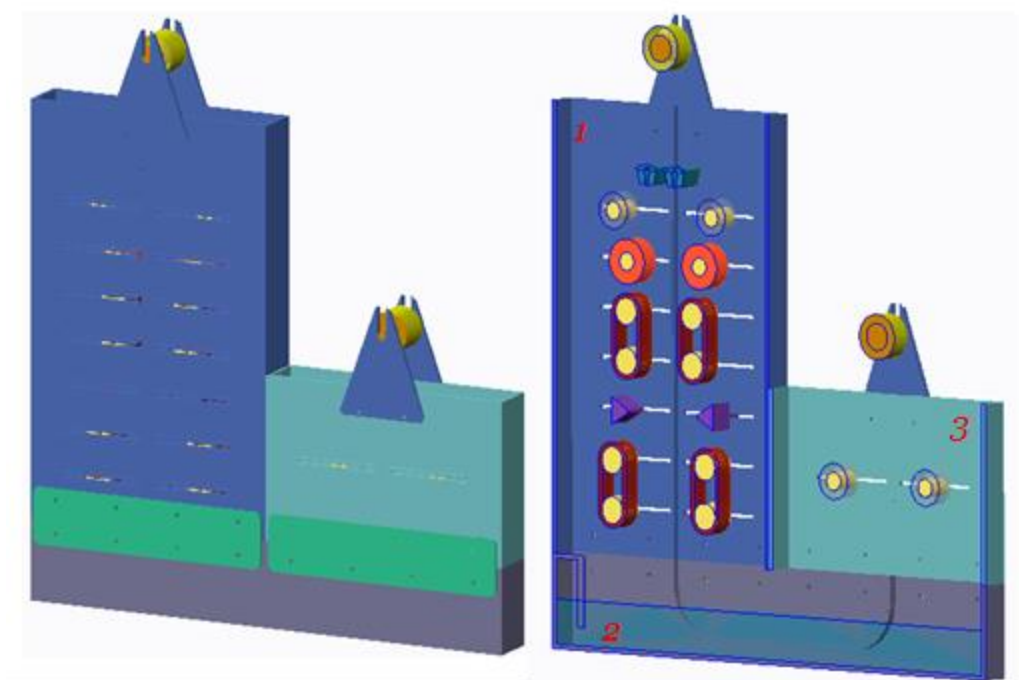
Three-unit detachable machine for roll-to-roll graphene transfer
